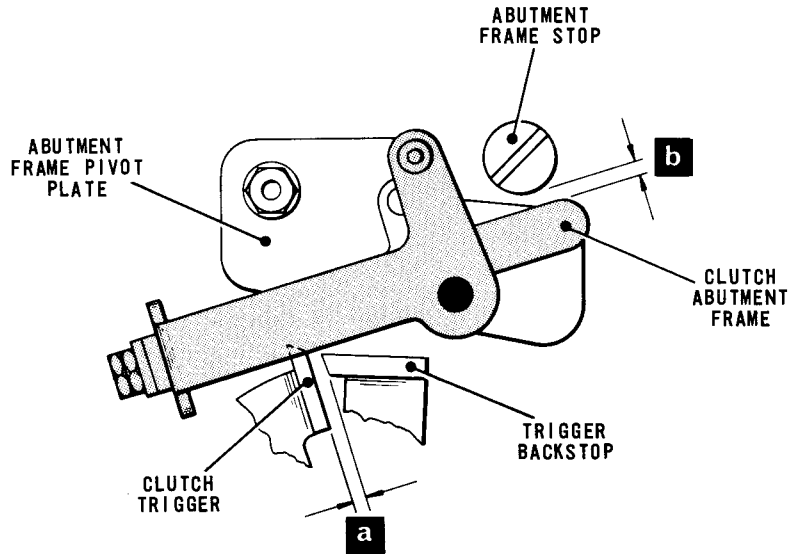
TRANSLATOR CLUTCH TRIGGER MECHANISM
